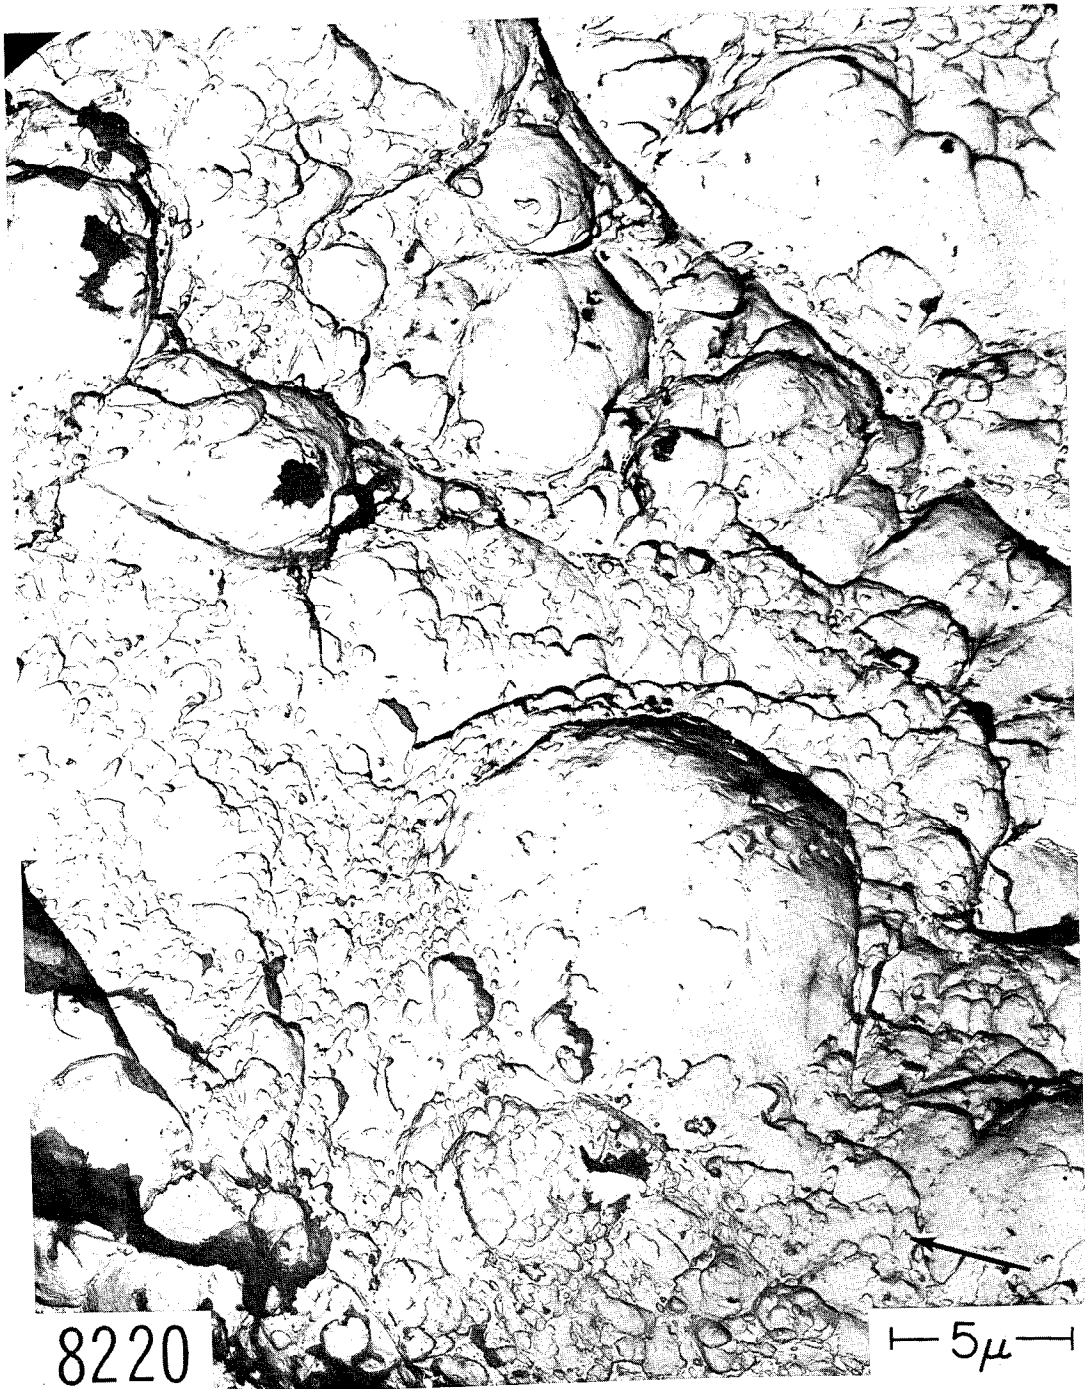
Dimples in monotonic fracture surface of HY 110 steel. Cellulose acetate-carbon replica technique. Palladium shadowed. 6000X.
